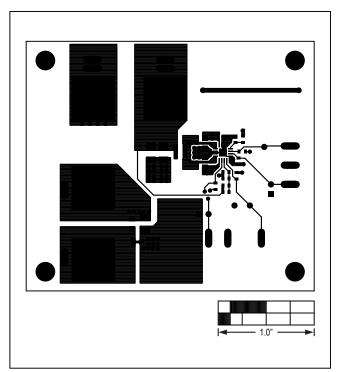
MAX16962R EV Kit PCB Layout—Component Side
